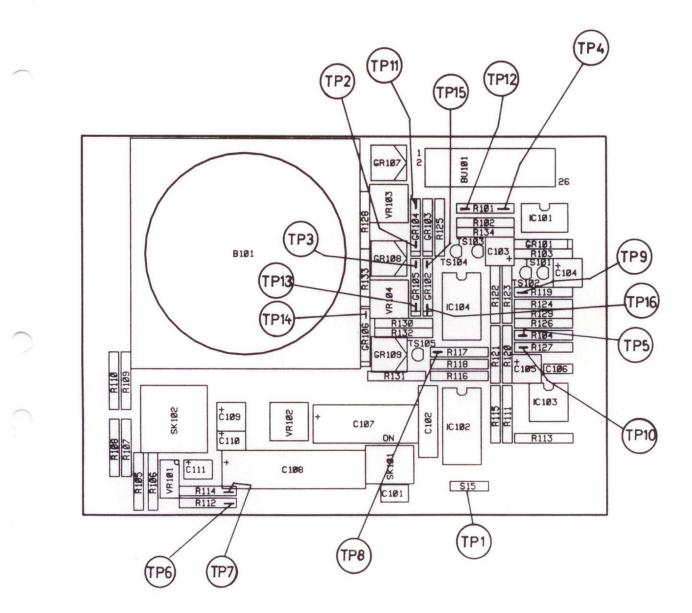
Testpoints in Q 4700, PC board No. 1.
